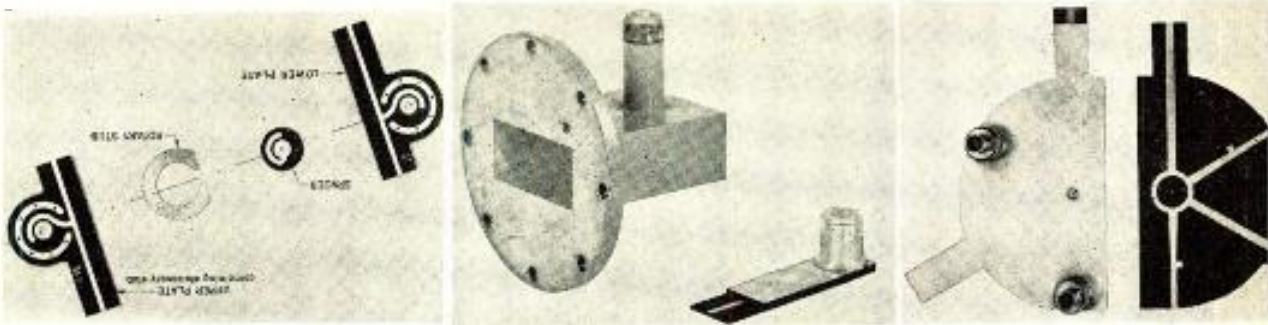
(r) Tri-plate hybrid ring with crystal holders. (a) Assembled and (b) Internal view
